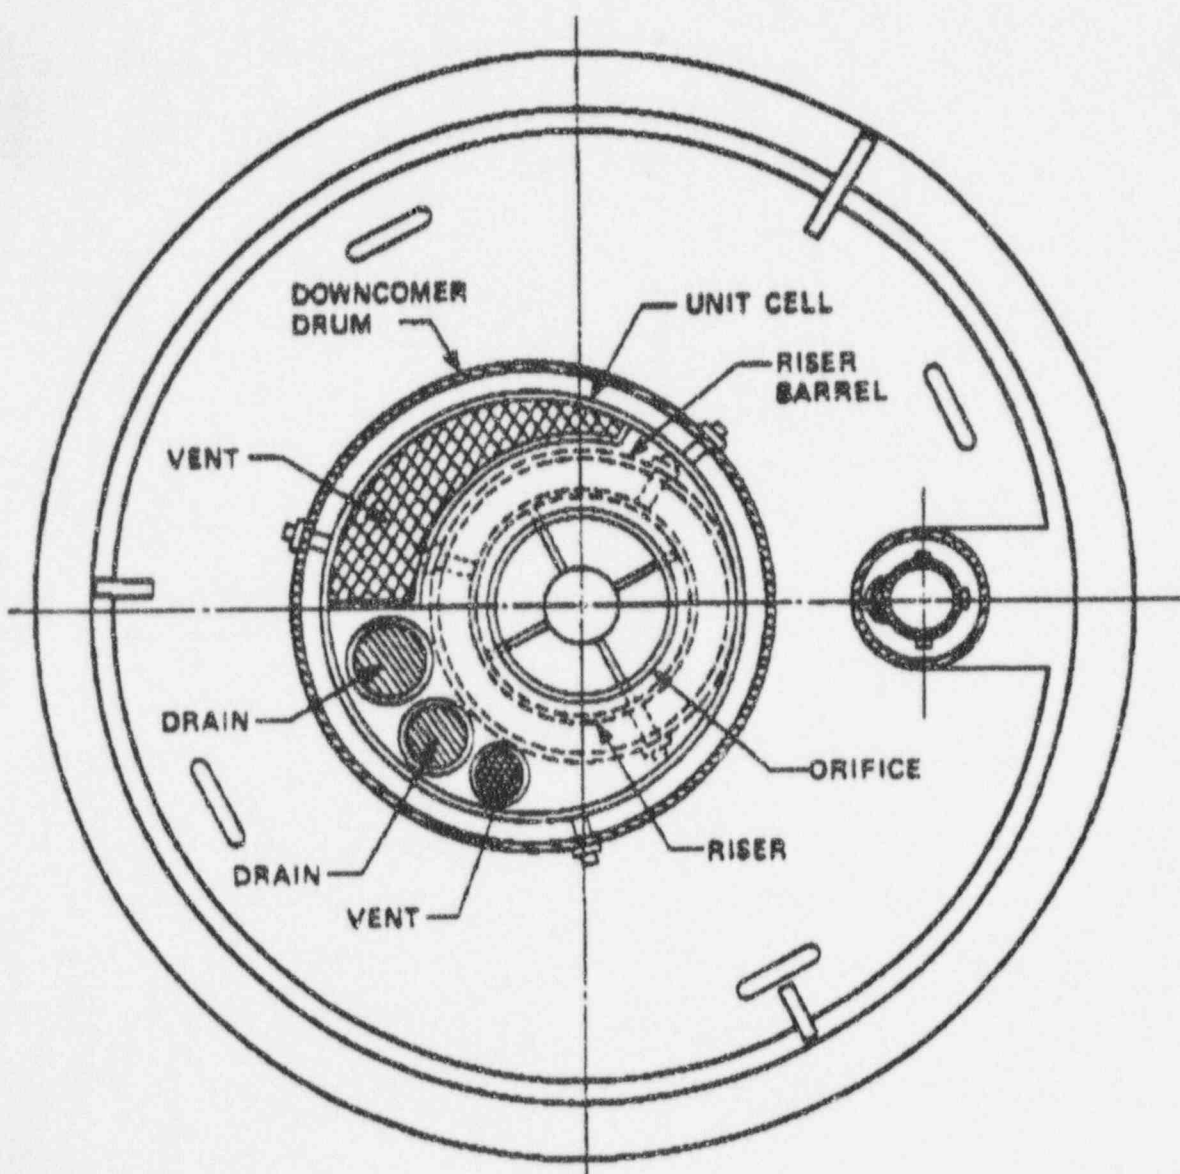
MB-2 Cross Section at Deck Plate (Elevation 477.01 in.)
